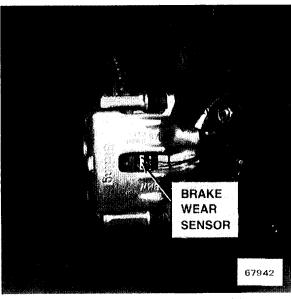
LH Front Brake Assembly (Wheel Removed)
